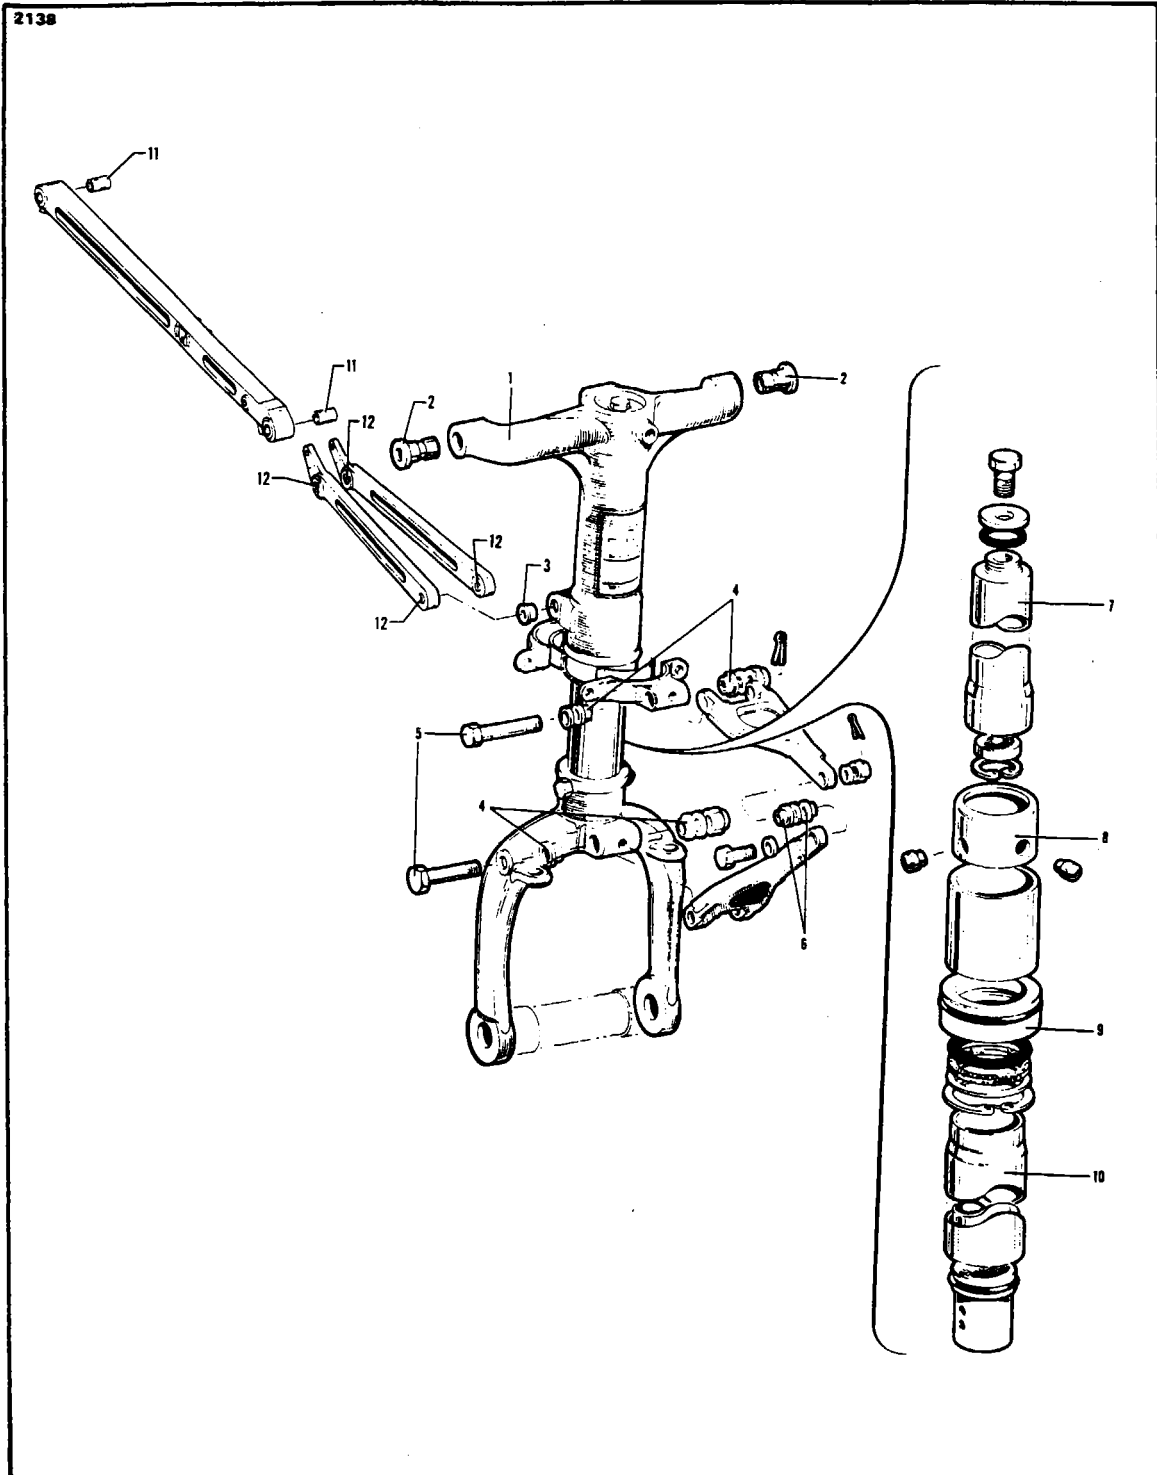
Nose Gear Oleo Service Tolerances
